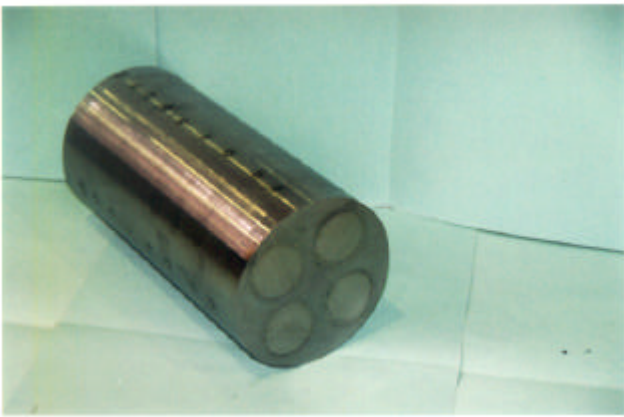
Drilled tubes and plate tube and welded before hiping
